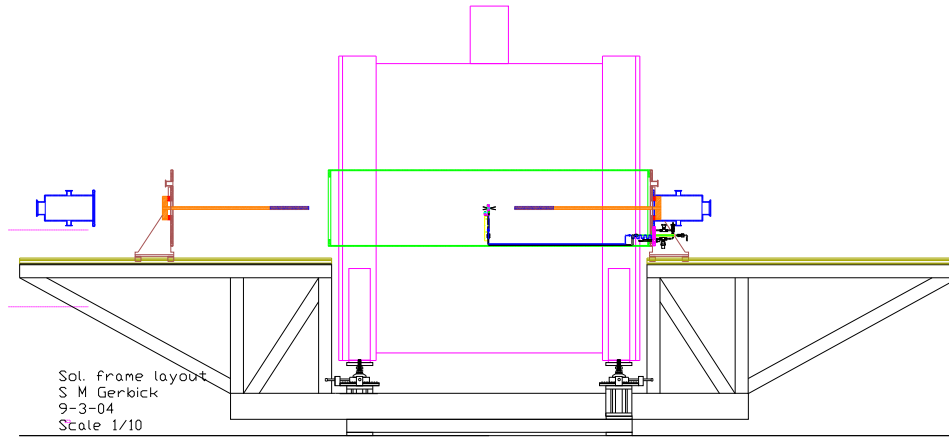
Schematic technical drawing of the proposed solenoid spectrometer.
